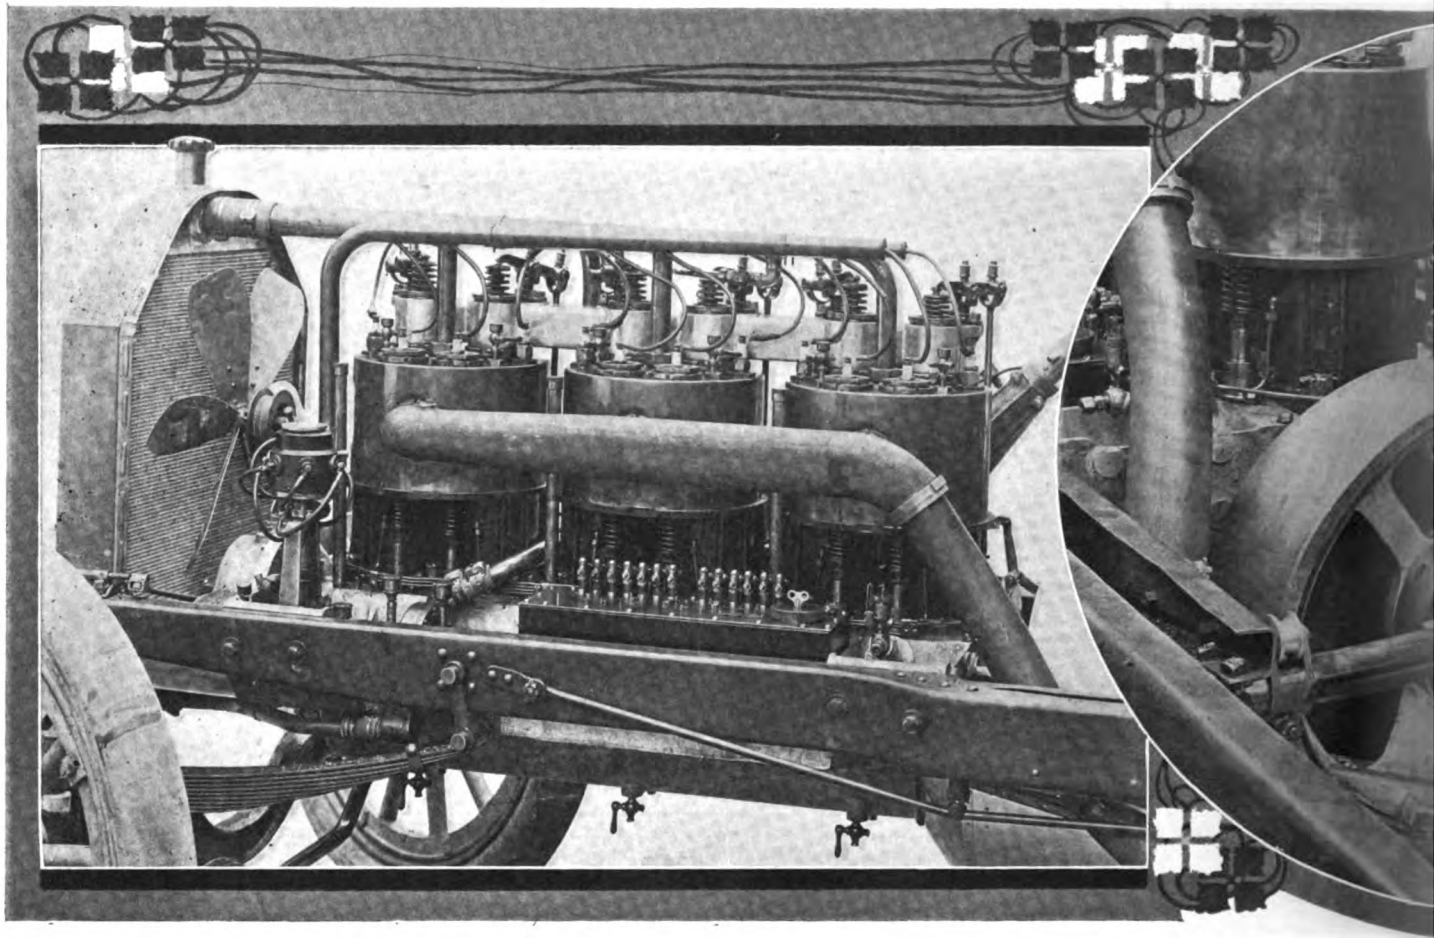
Left-hand side of engine showing lubricator, timer and other details
